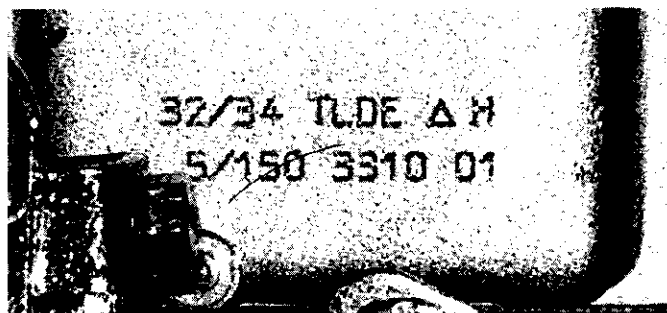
Weber TLDE identification markings (Sec 2)
